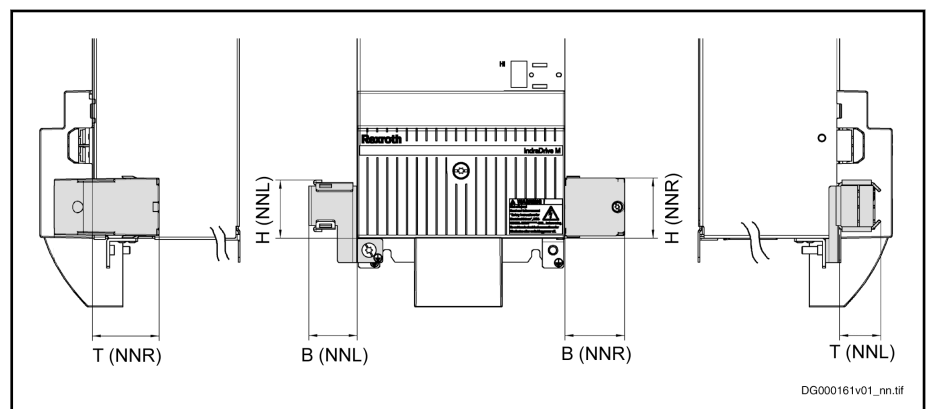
Mounting dimensions HAS05.1-004-NNR, -NNL
